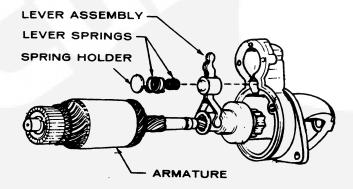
REMOVING ARMATURE FROM SOLENOID SHIFT STARTER
